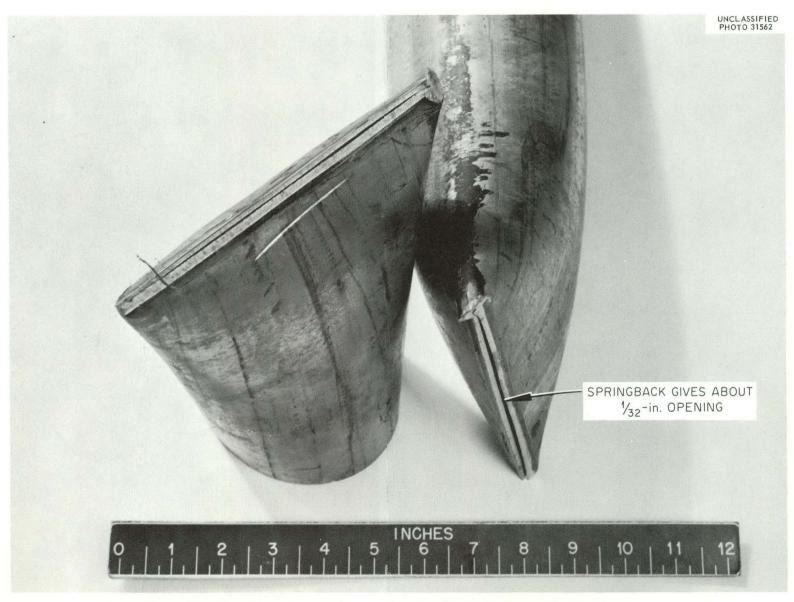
Cut Section of 4-in. Sched.-40 Stainless Steel Pipe.
